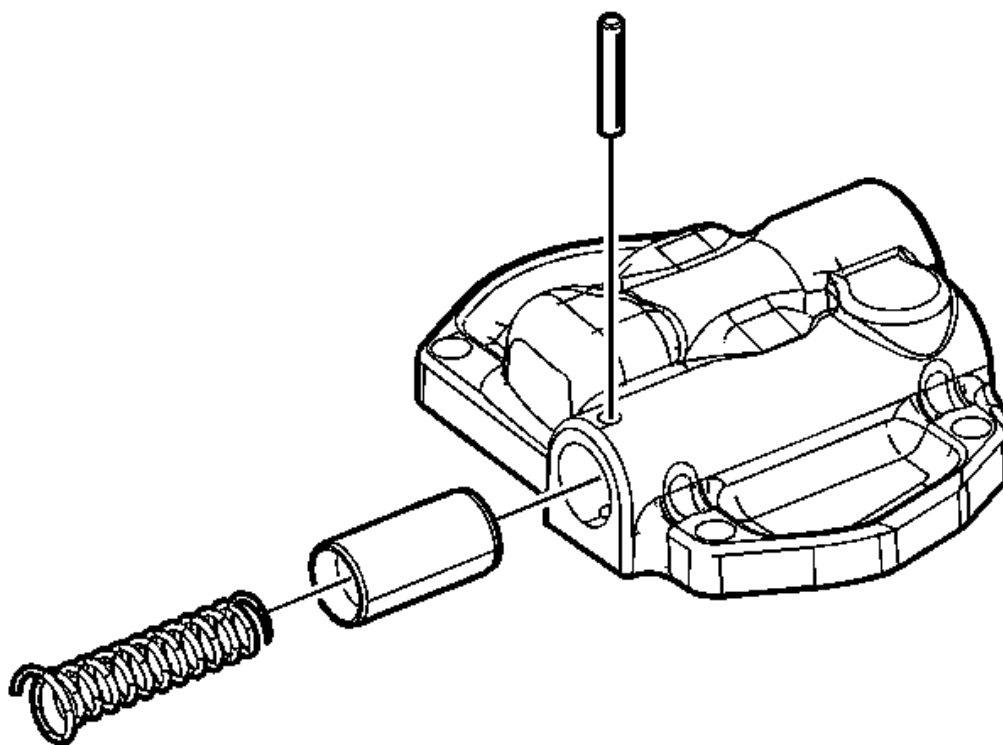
Identifying Oil Pump Pressure Regulator Valve
